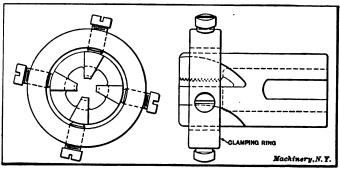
Spring Screw Threading Die and Adjusting Ring
